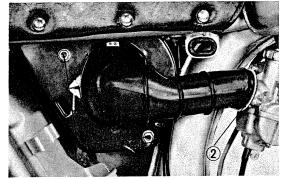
① Mounting nut ② Air cleaner connecting clamp
